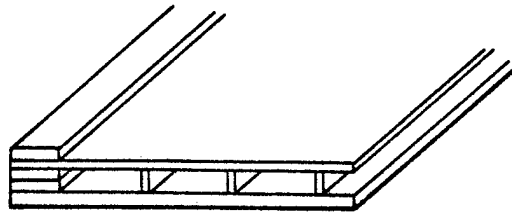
Fabrication Layup Design Used to Prepare Y-Ring Structure⁽³³⁾
